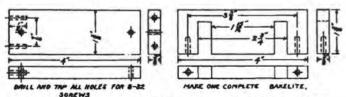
Dimensions of Bracket for Mounting Honeycomb Coil.
